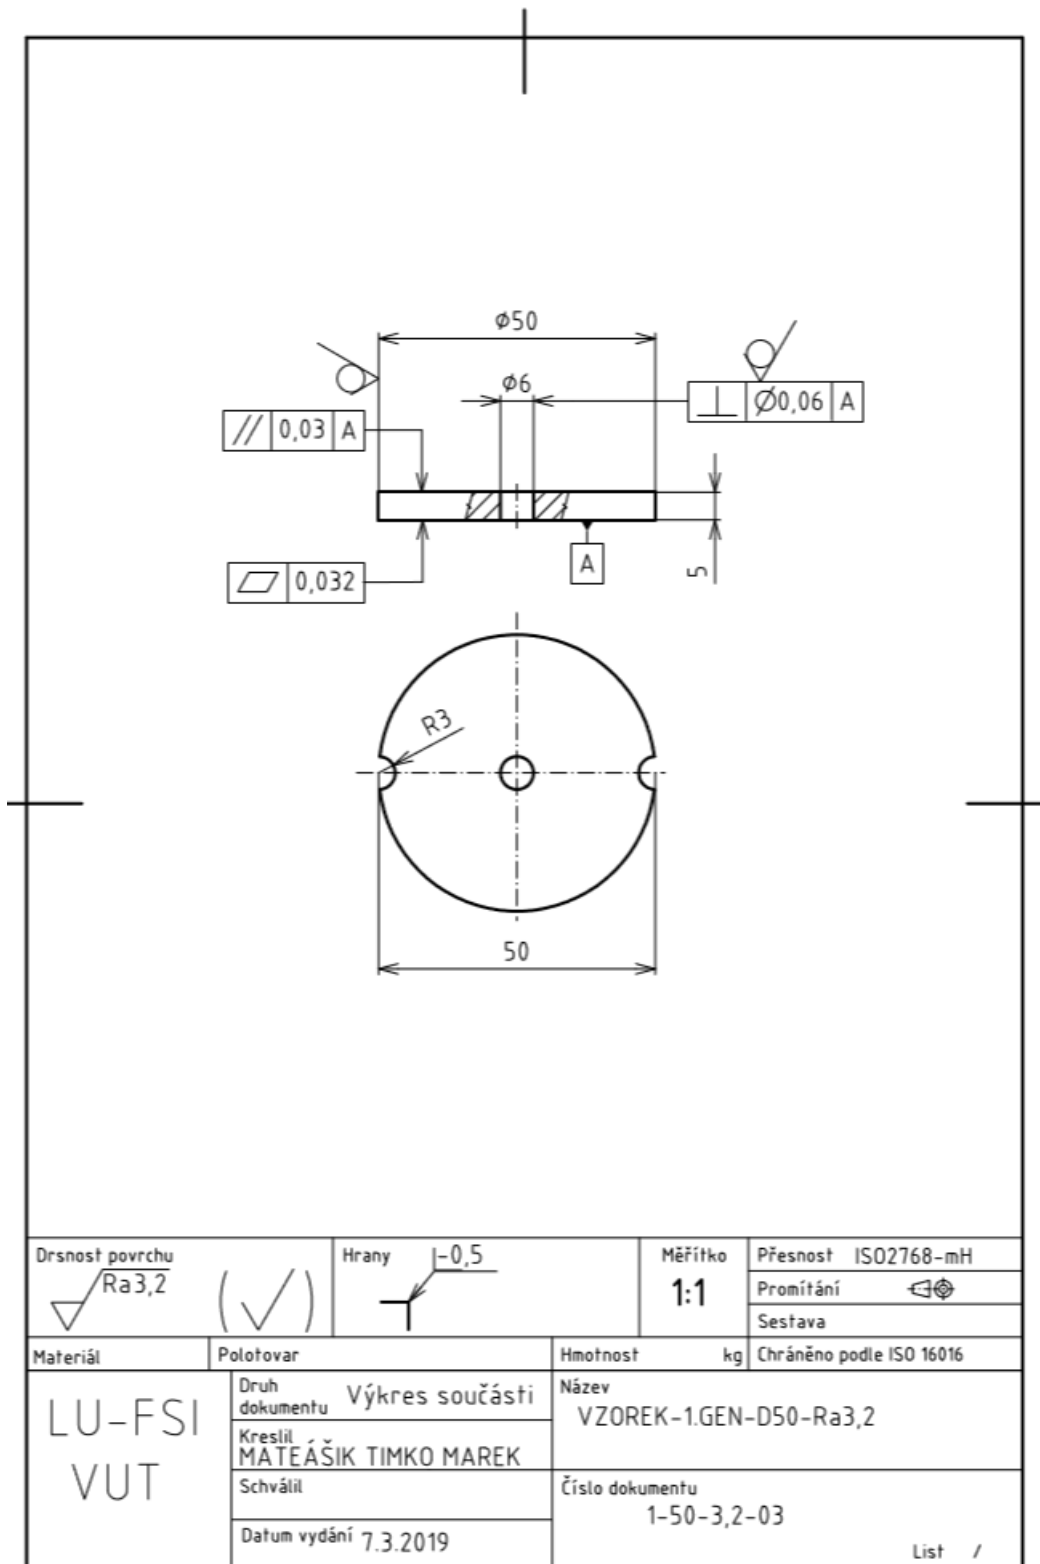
Mechanical drawing of specimen with diameter of 50 mm.
